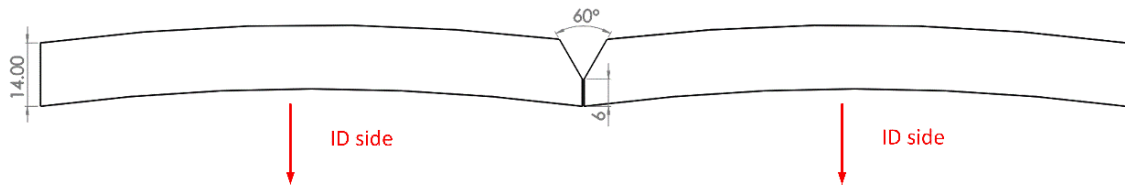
Groove design for X80 steel laser welding, showing the inside diameter (ID) side
